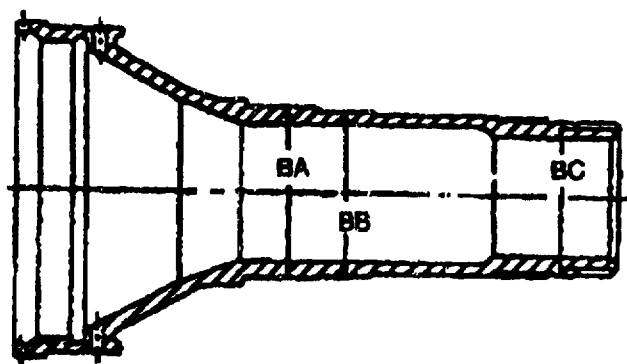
Compressor Rotor Assembly Dimensional Inspection Locations (T53-L-15, -701)
